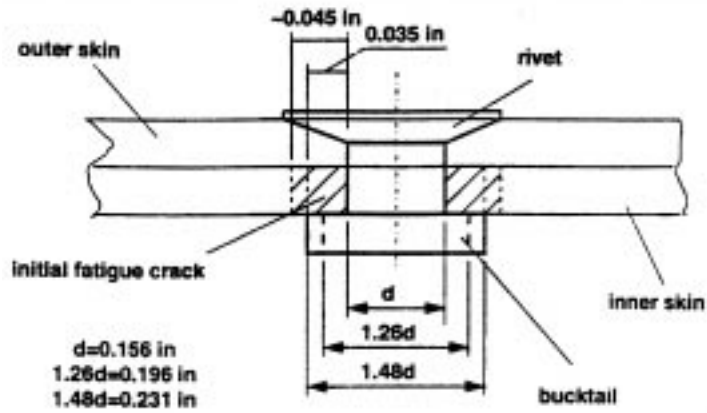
Initial Fatigue Crack in the Inner Skin.
